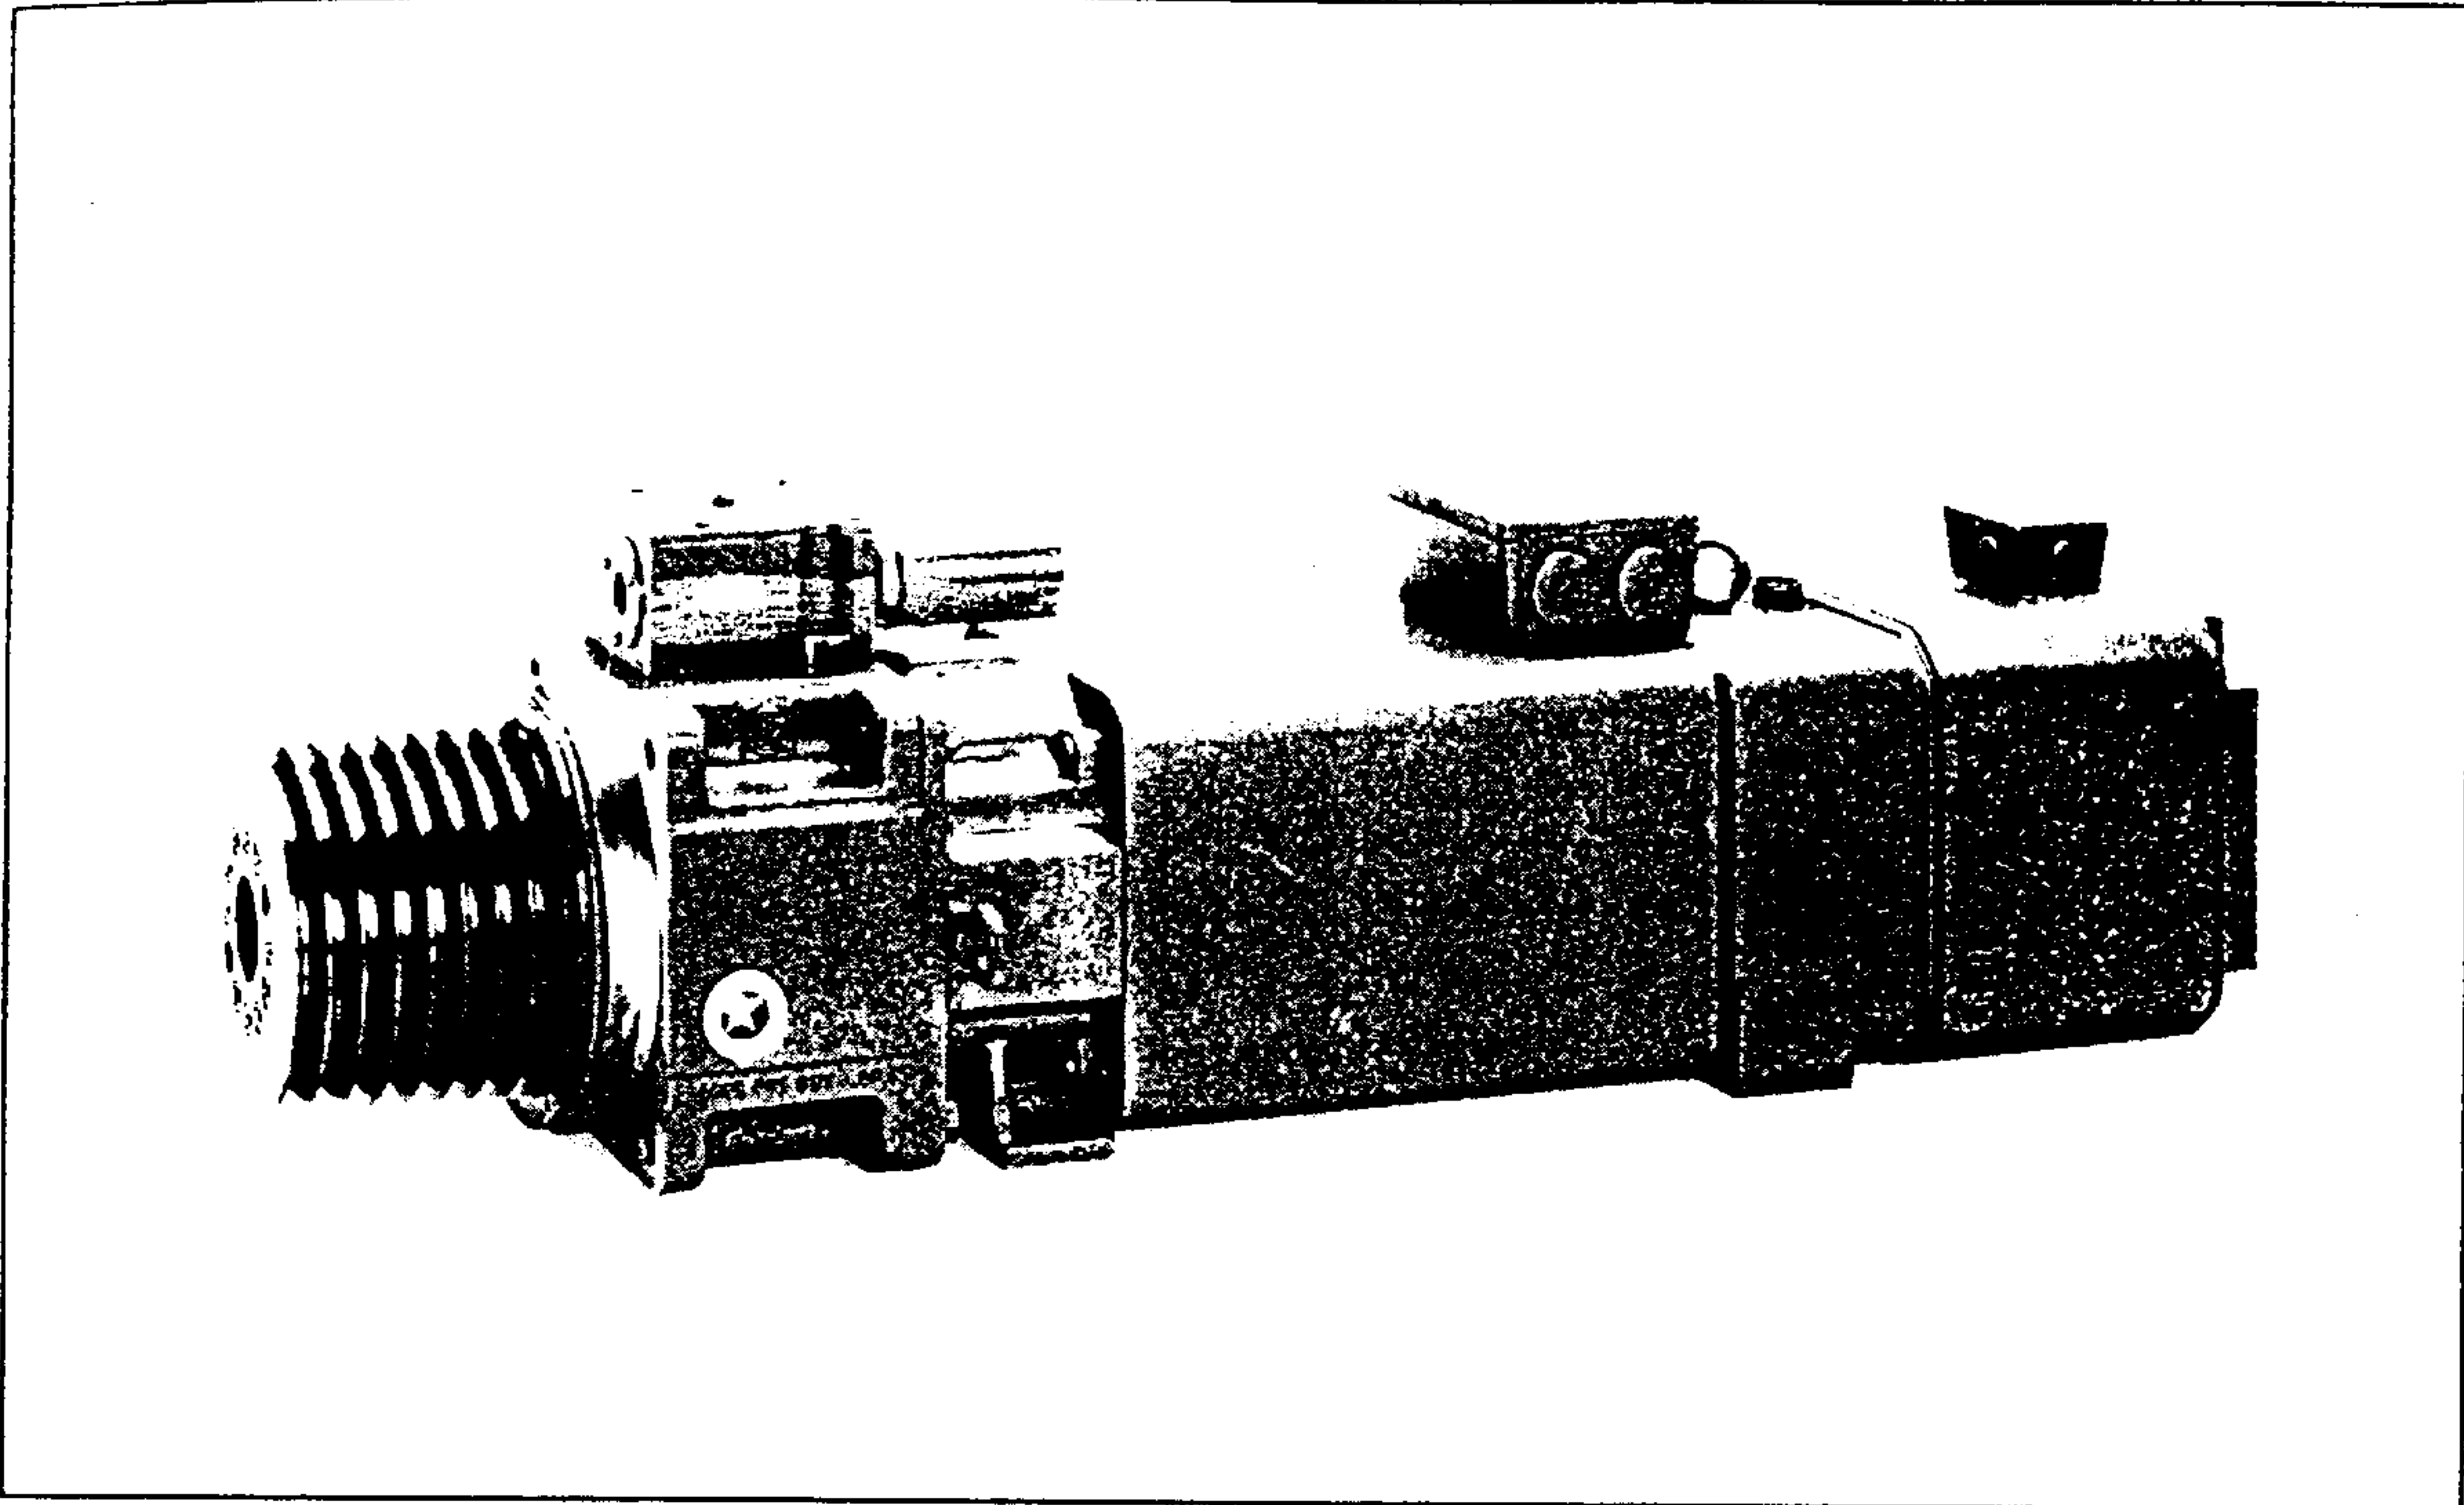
AC motor (15 kW) with ZF gearbox as compact drive unit
